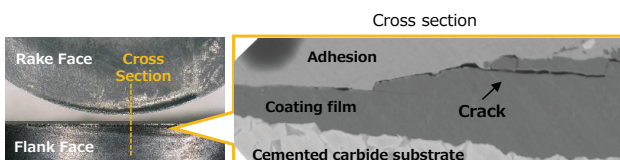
Cross sectional morphology on the damaged cutting edge
